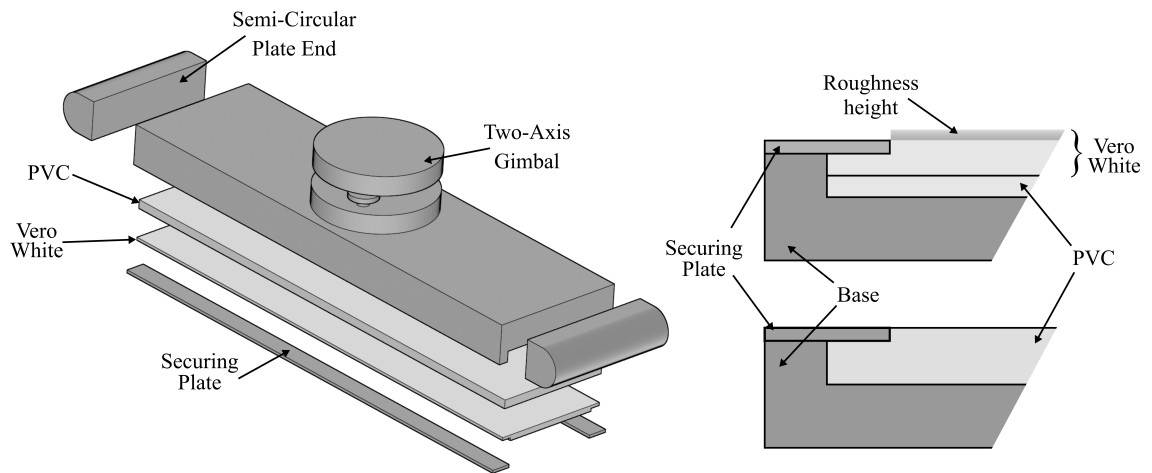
Plate assembly (left) and plate cross sections (right) for the 3D printed (upper) and smooth (lower) plates.
